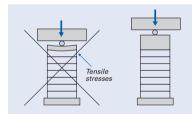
Proper dimensioning of the end pieces in the case of point contact
